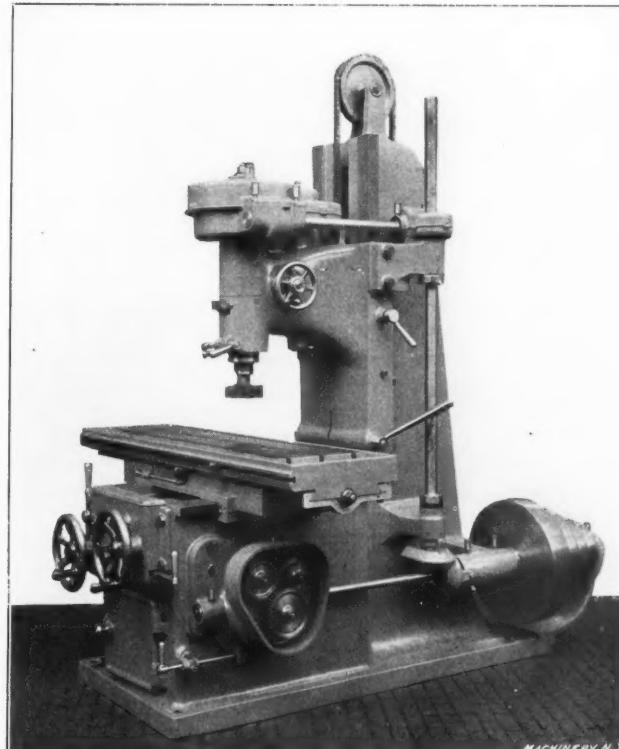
Vertical Milling Machine designed for a Wide Range of Work
